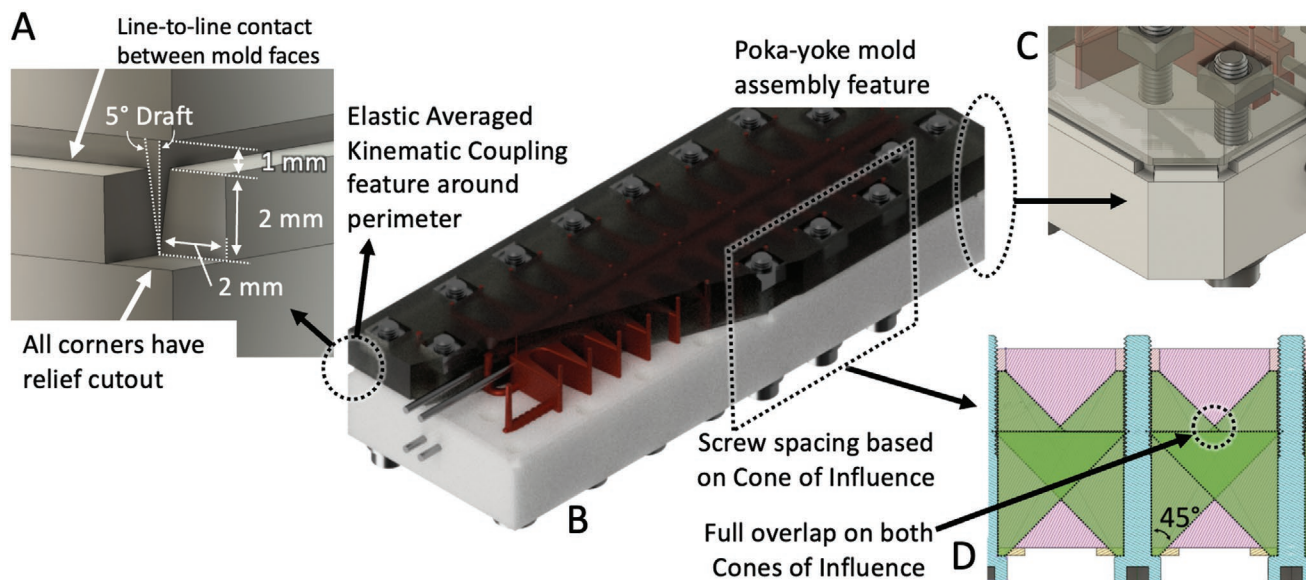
Mold design guidelines for injection molding. A) Elastic averaged kinematic coupling design showing sizing and draft angles for line-to-line contact; B) full mold showing cutaway; C) poka-yoke assembly feature with a 45° cut to prevent simple assembly mistakes; D) cone of influence drives the fastener spacing, ensuring clamping forces are properly distributed to seal the mold faces.
